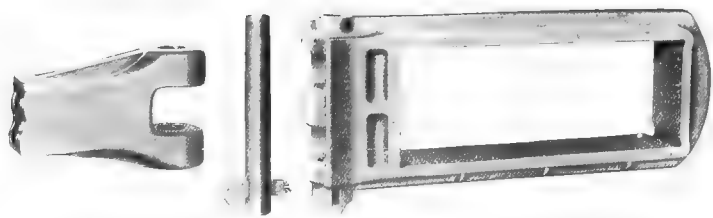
Cast Steel Yoke with Quadruple Shear Pivot Pin.
